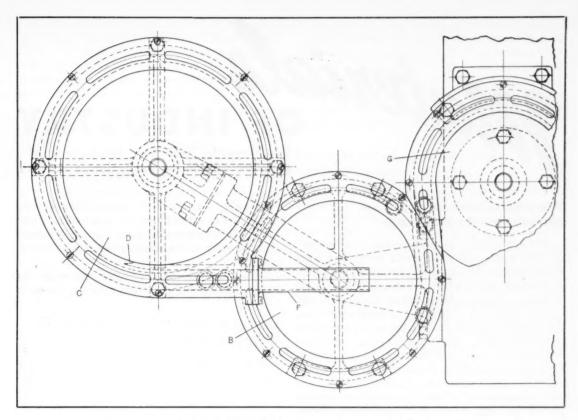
Plan view of bottle cap feeding equipment shown in Fig. 1.
